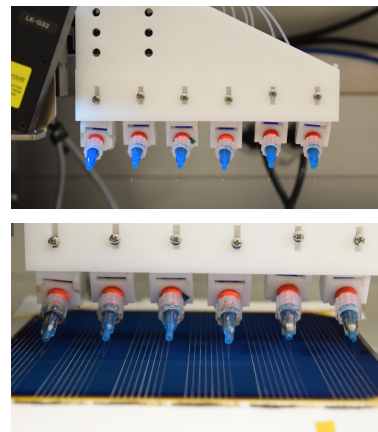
Summary slide showing our multi-nozzle printer setup demonstrating that fingers metallization lines can be printed in parallel.
